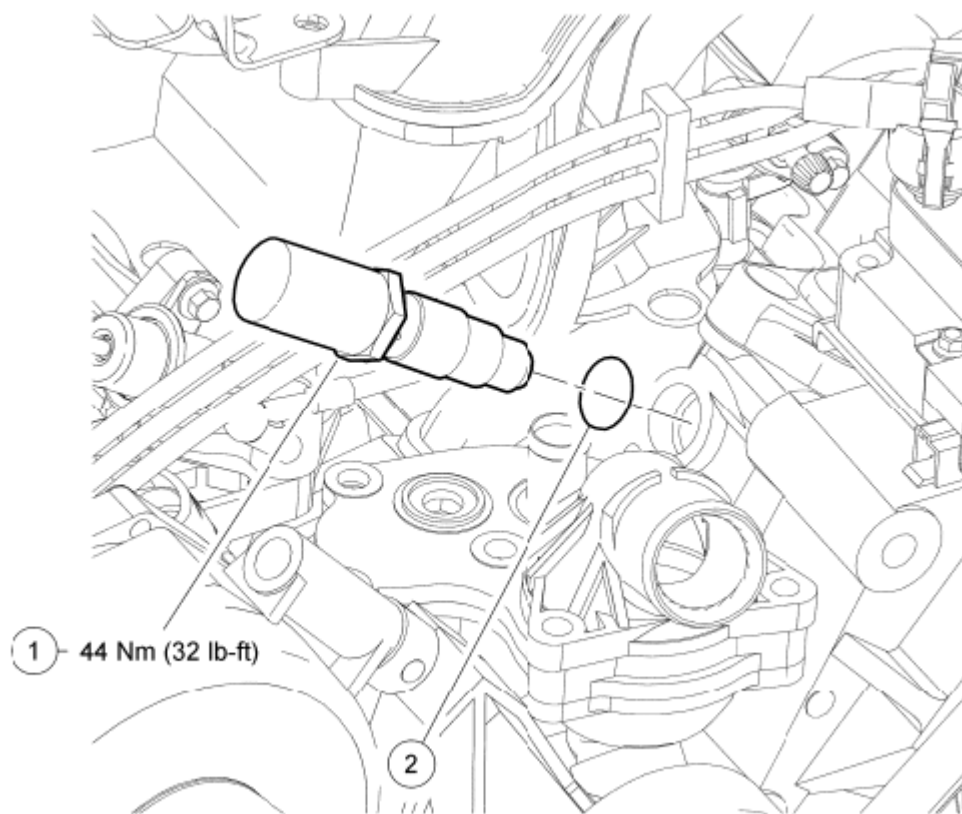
Identifying Hydraulic Timing Chain Tensioner LH With Torque Specifications
